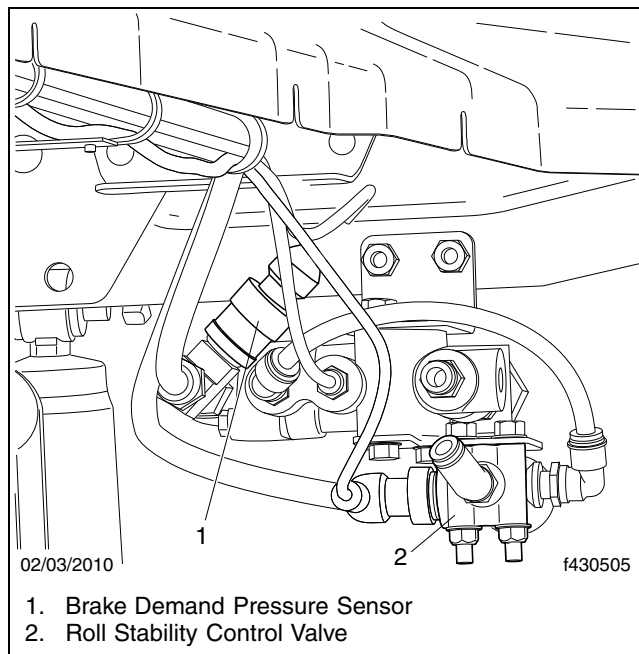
, Pressure Sensor (mounted on trailer protection valve)
